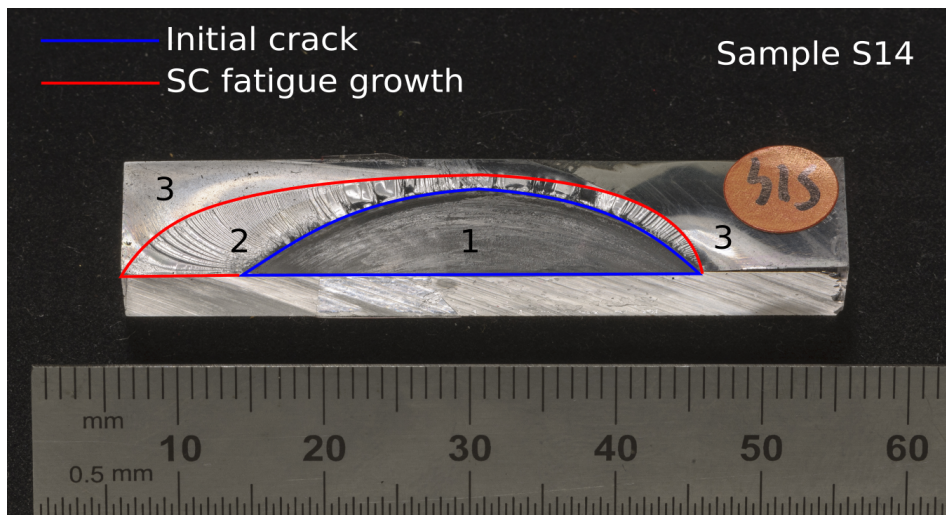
Test on Perspex plate - Fracture surface - Sample S14
